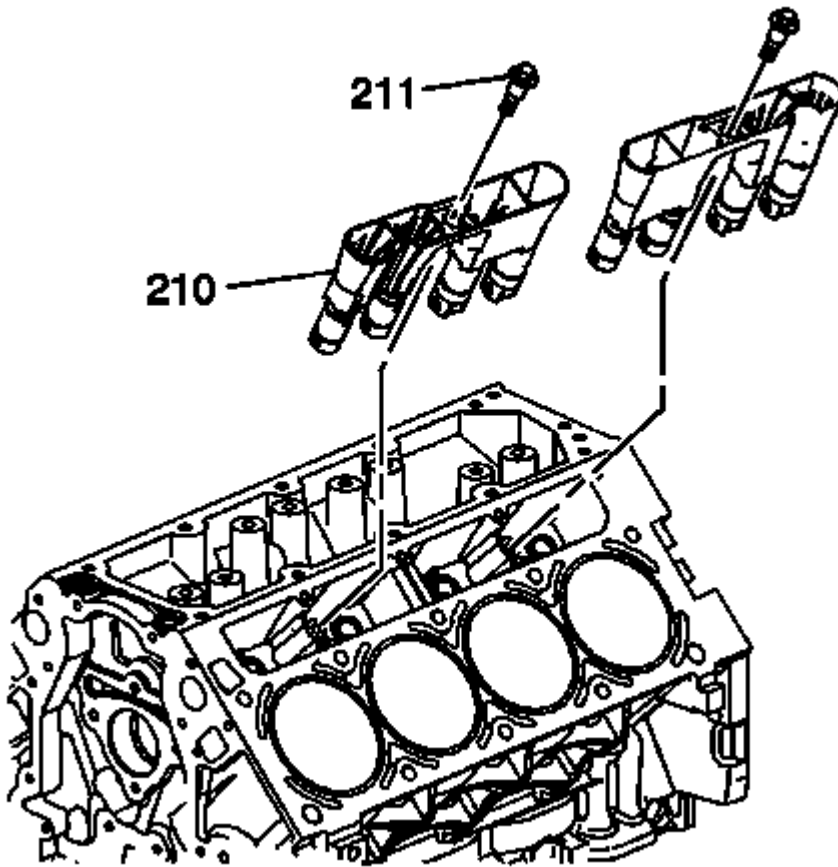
Exploded View Of Lifter Guides & Lifters
